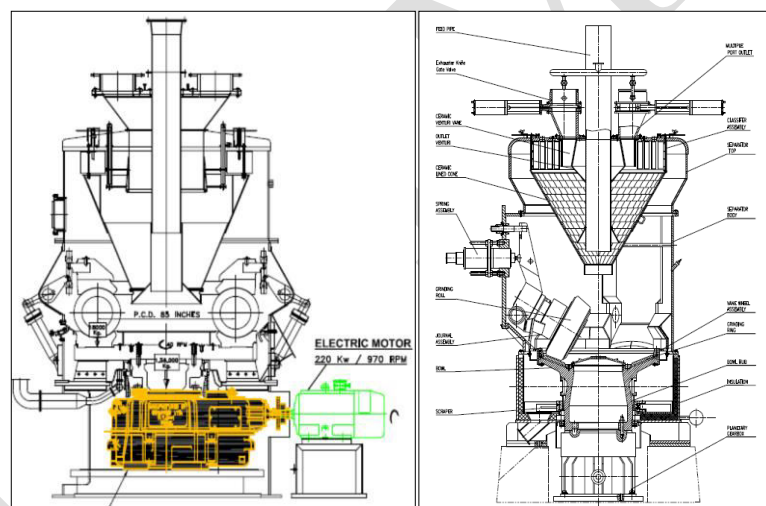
VRM with Bevel-Helical Gearbox (Left) and Bevel-Planetary Gearbox (Right)
